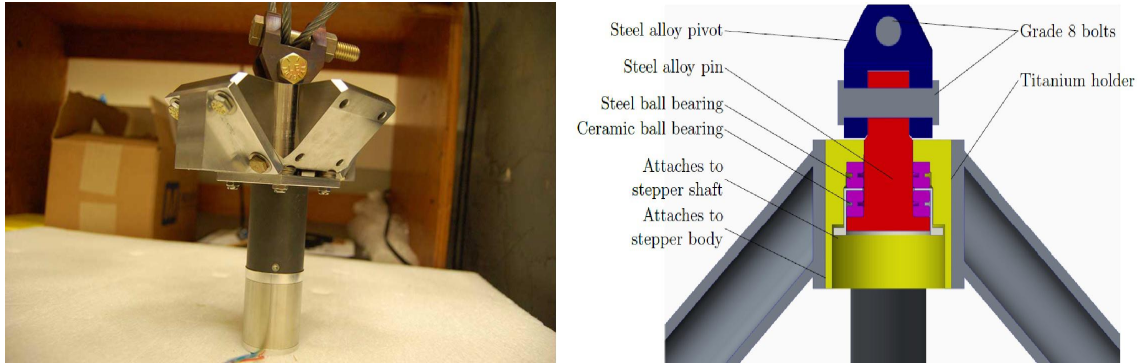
The pin that attaches to the balloon contains the stepper motor and the bearings to dump momentum to the balloon attachment assembly
